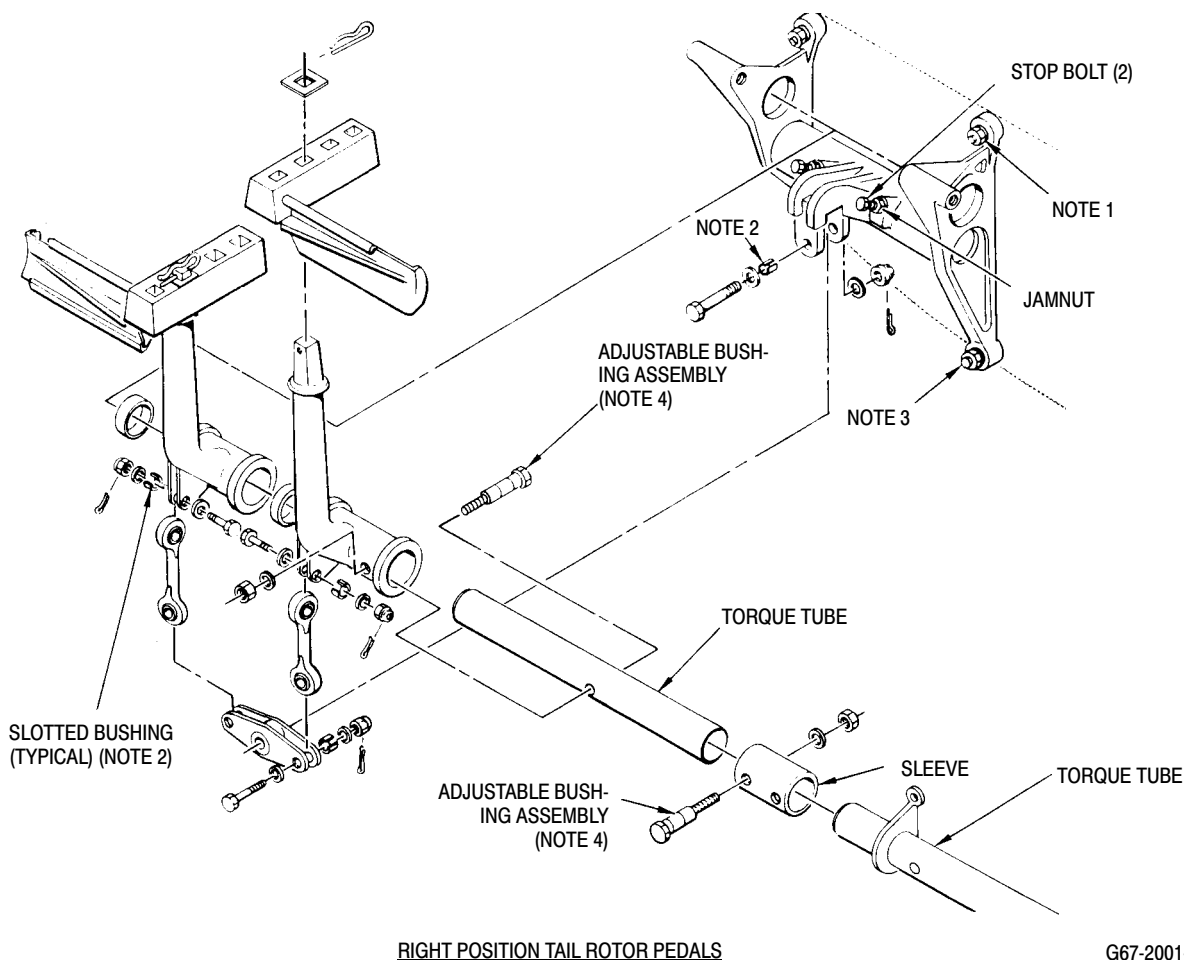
Tail Rotor Pedal Installation (Sheet 2 of 2)
